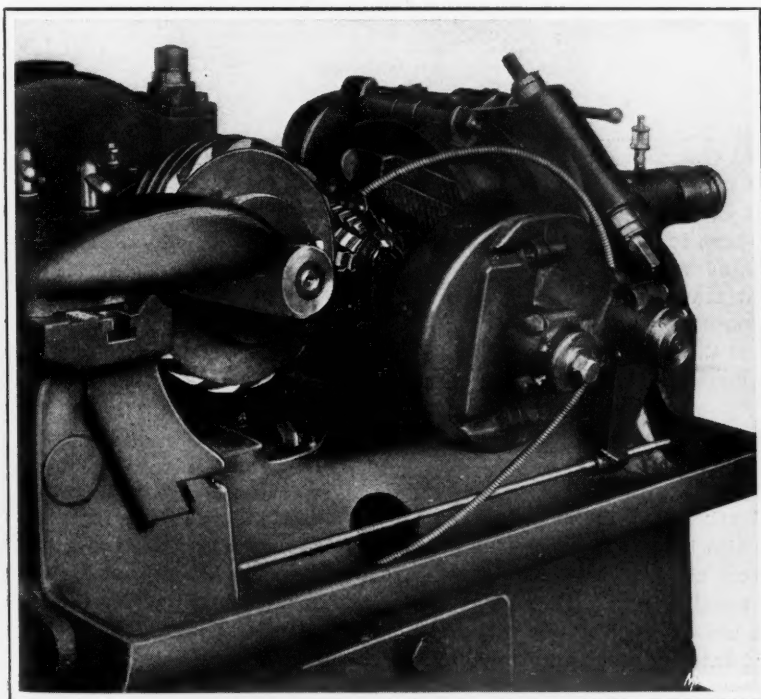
Cutting a Helical Gear having Teeth of Very Large Helix Angle
